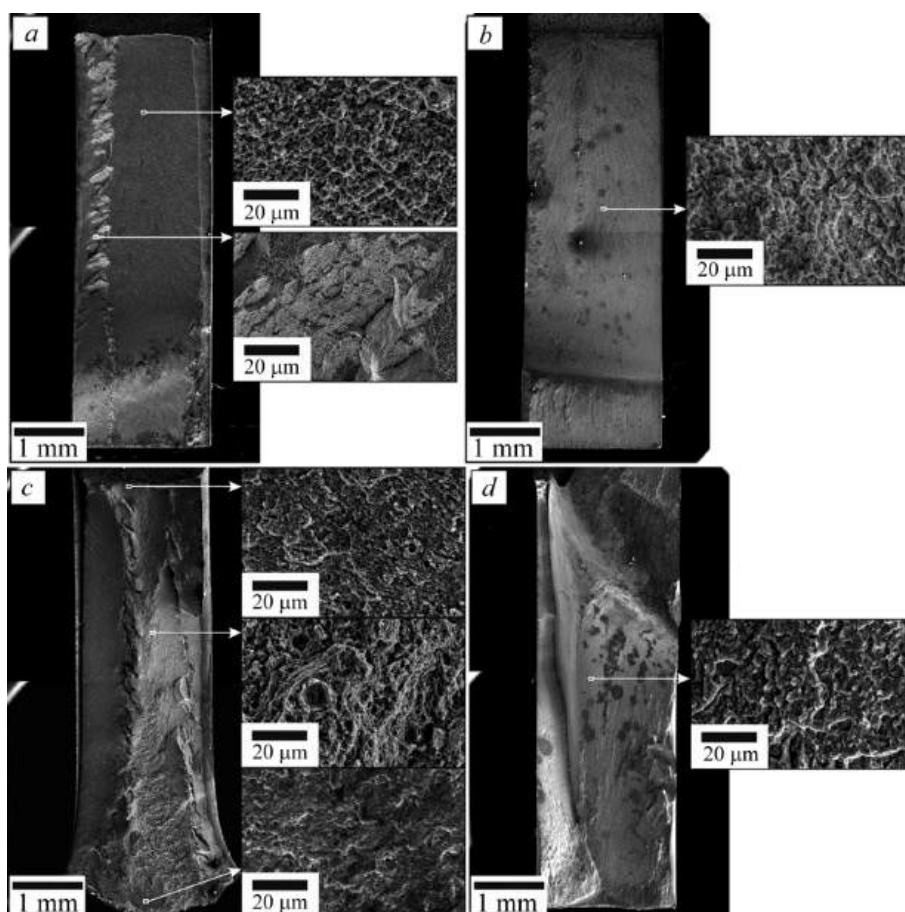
Fracture surfaces of 0.35C steel subjected to FSW and impact tests at 20°C (a) or -196°C (b); fracture surfaces of 0.35C steel subjected to FSW followed by tempering at 650°C and impact tests at 20°C (c) or -196°C (d).
